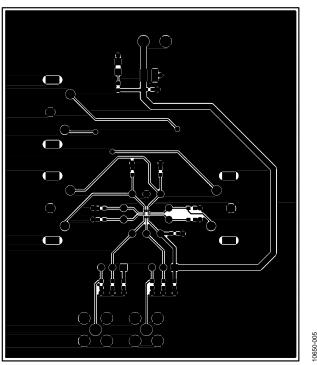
PCB Drawing Layer 1 (Top Layer of the EVAL-ADG854EBZ Evaluation Board)
